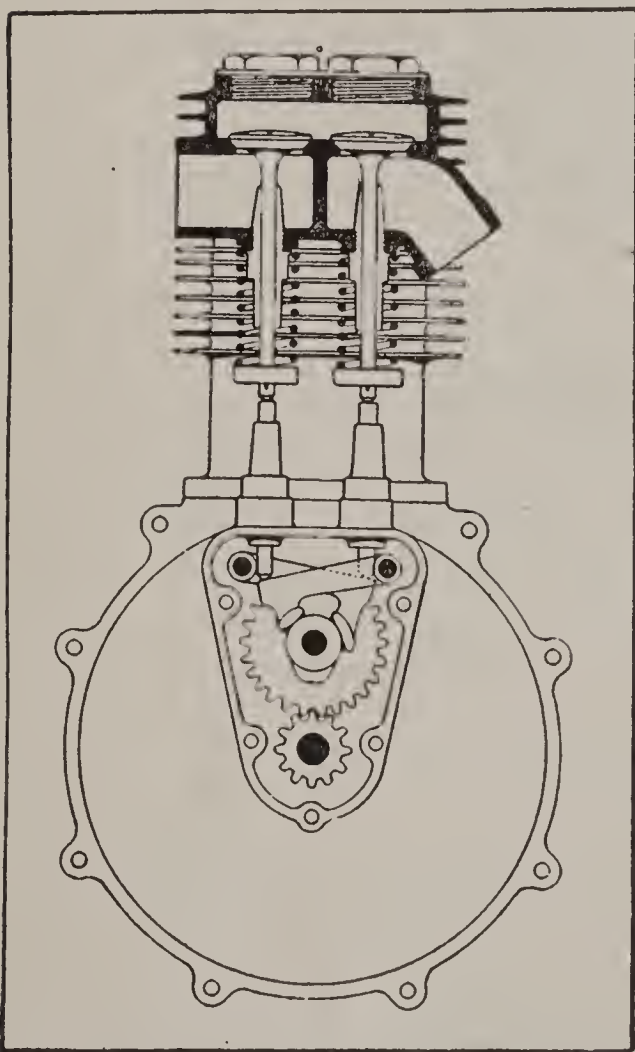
Sectional View of L Head Cylinder, Showing Arrangement of Valves When Duplicate Members are Used for Inlet and Exhaust Port Control.
